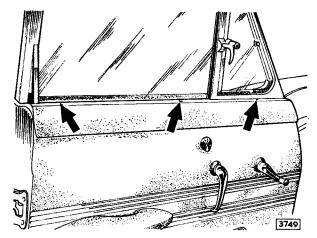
Showing the three screws which secure the padded waist rail to the door frame
